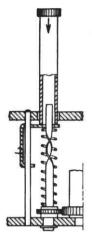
A metal strip or square rod can be twisted to make a long-lead thread. It is ideal for transforming linear into rotary motion. Here a pushbutton mechanism winds a camera. The number of turns or dwell of the output gear is easily altered by changing (or even reversing) the twist of the strip.
